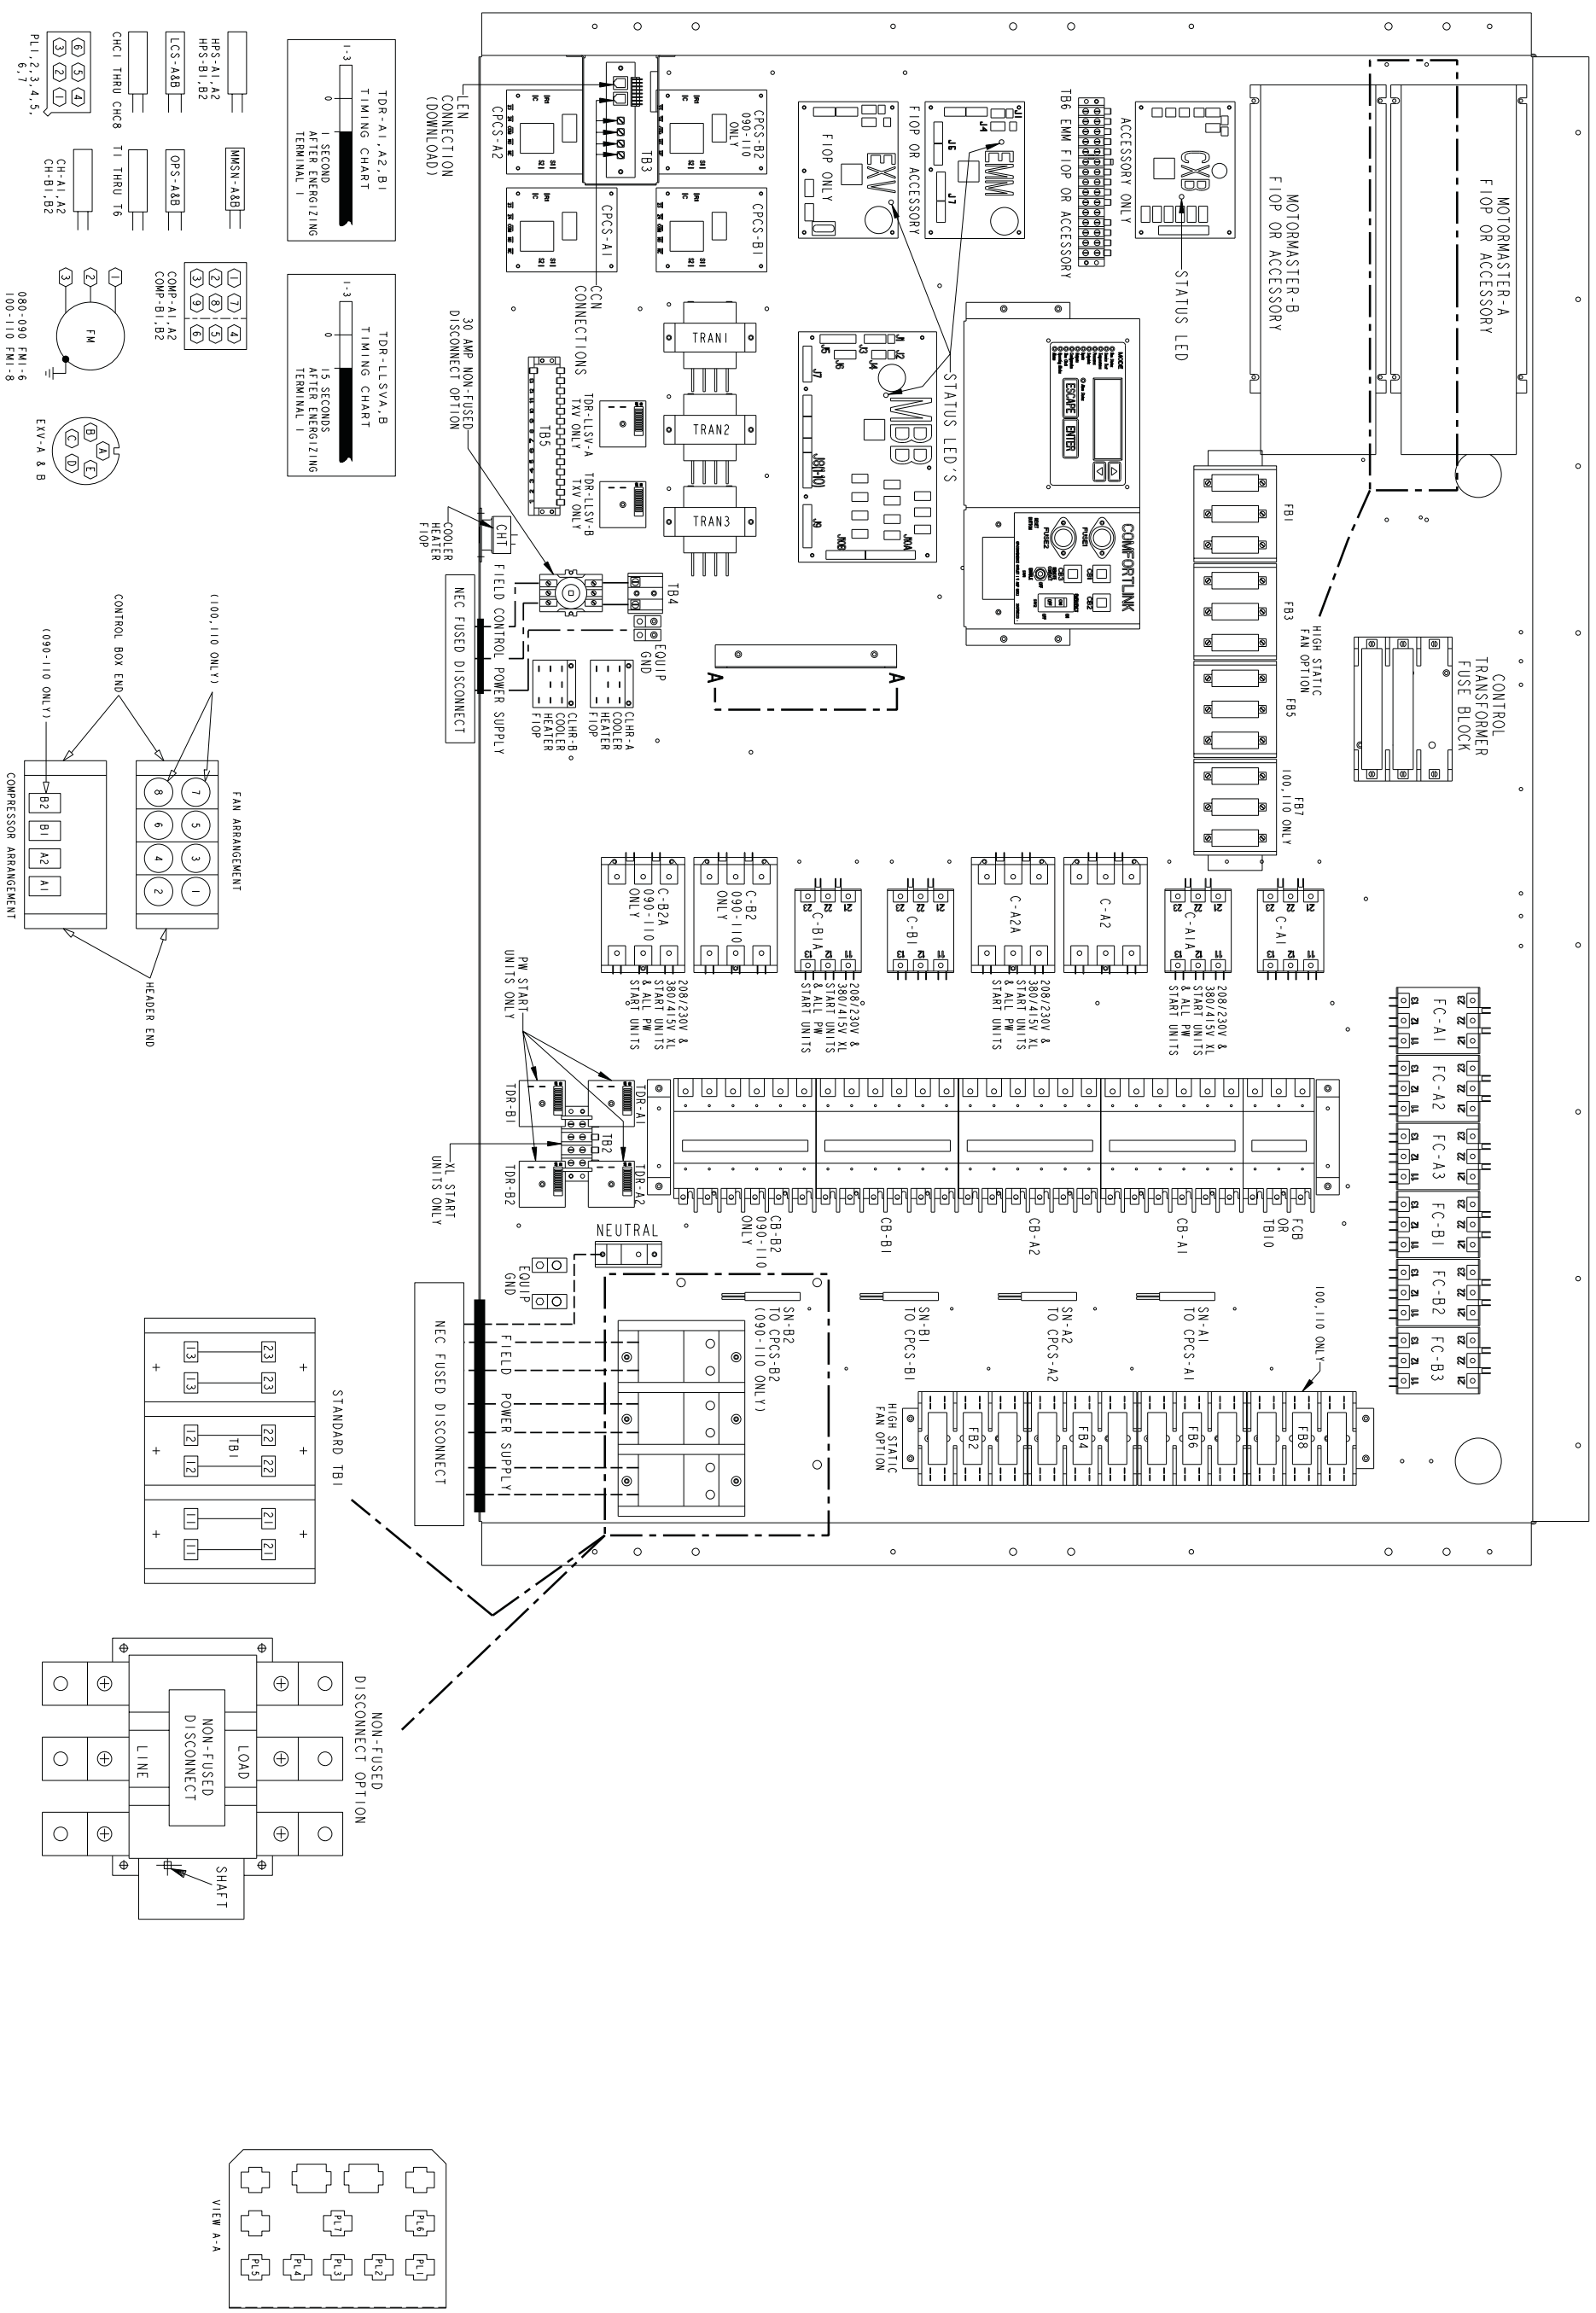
Component Arrangement; 30GTN, GTR, GUN, GUR080-110, 230B-315B
